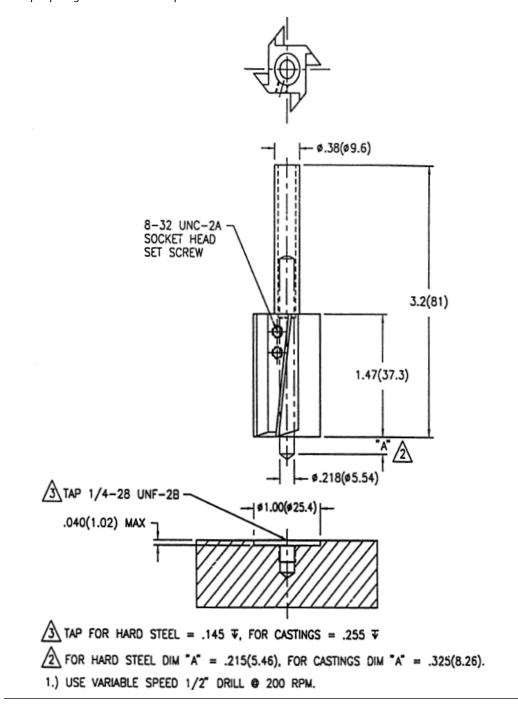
shows specifications for drilling and spot face grinding when mounting accelerometers using the stud mount method, and Figure A-4 shows the correct and incorrect milling process.
